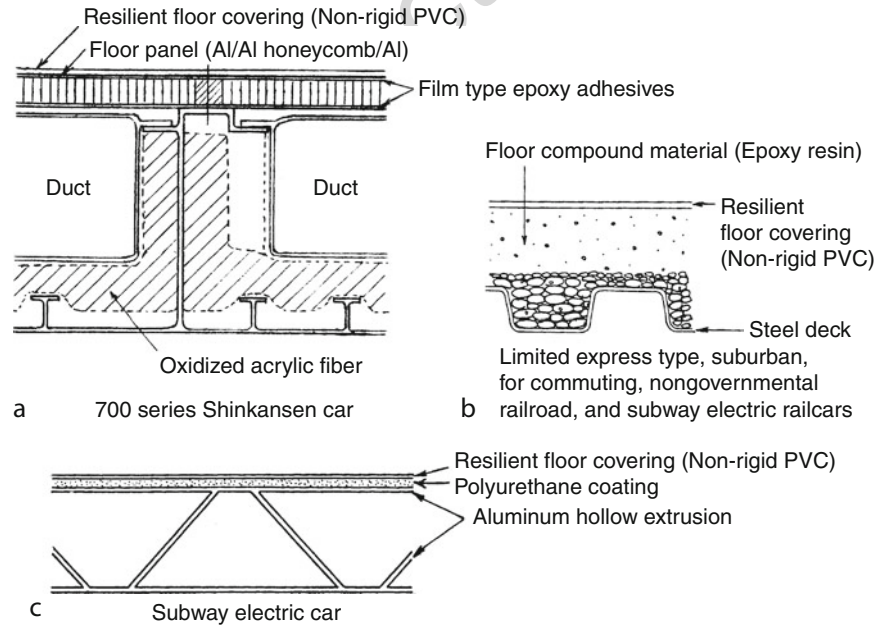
Typical floor structures of railcars (Suzuki 2007)
